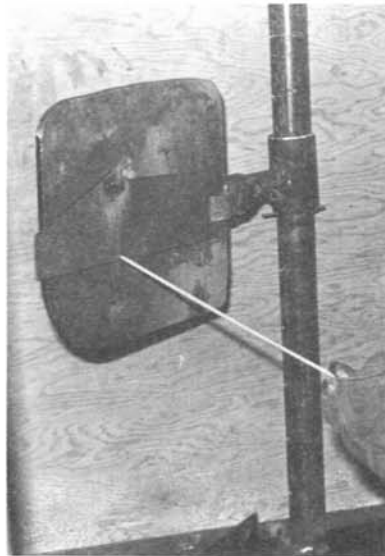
Electrode is held at 90-degree side angle and 5- to 10-degree incline angle for vertical up weld.
